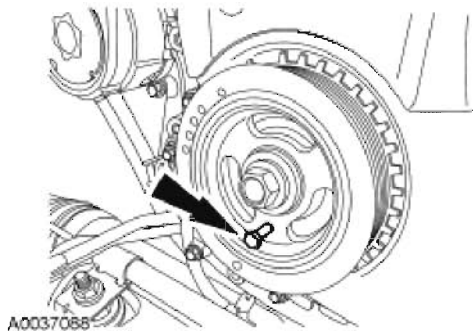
Installing Bolt Through Crankshaft Pulley And Thread It Into Front Cover
